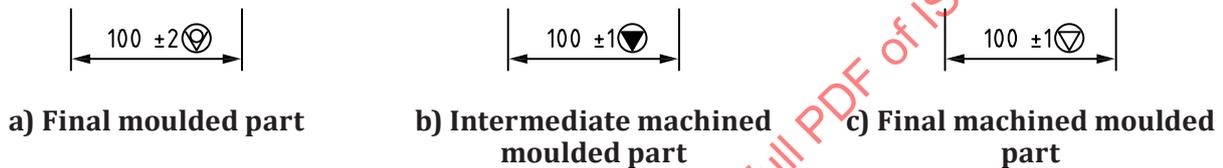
Examples of nominal dimensions with individual tolerances
